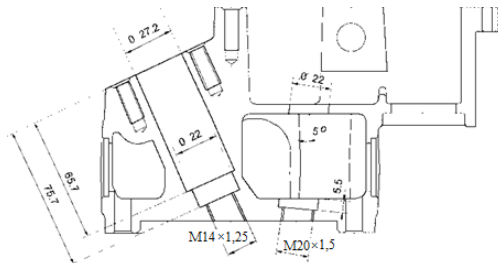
The holes on cylinder head (Left side hole for spark plug and right side hole for pressure transducer)
